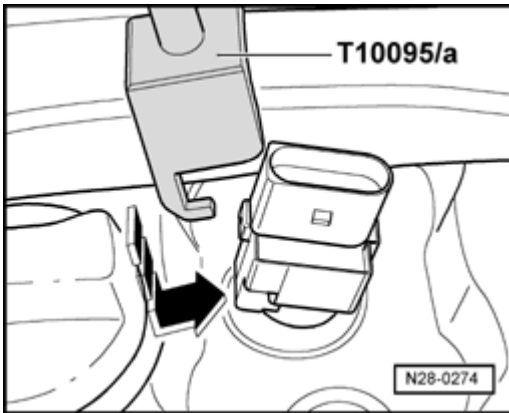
Pushing The Remover T10095/A From The Straight Connector Side
